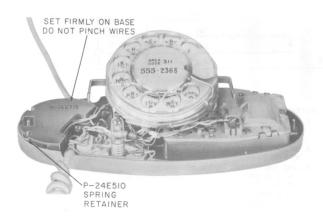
Location of P-24E510 Spring Retainer and P-15E719 Weight
